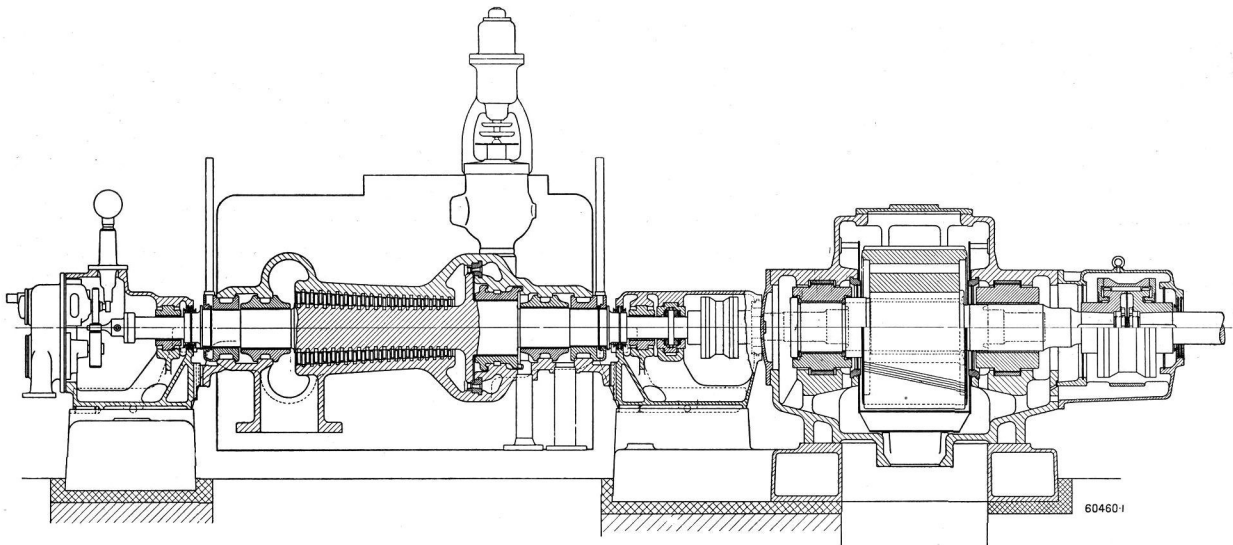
Section through a high-pressure primary turbine of 4150 kW with gearing, for 100 kg/cm² and 500° C.
